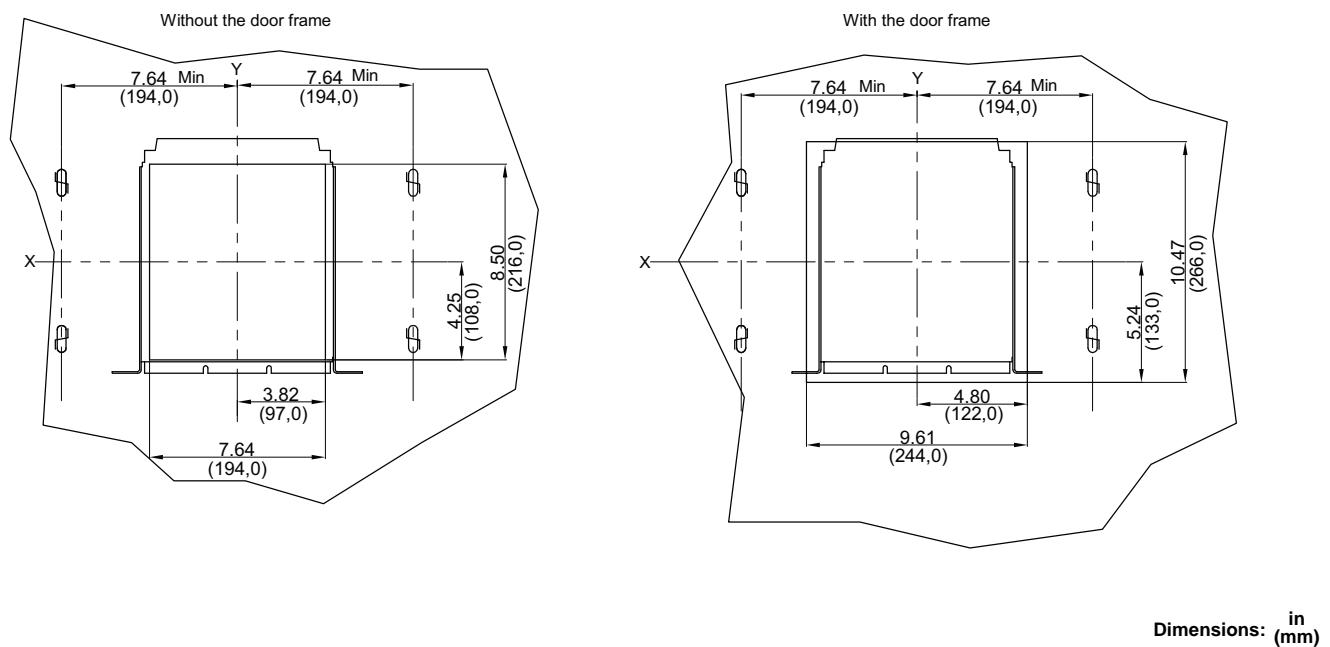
800-1200 A MasterPact NT IEC Four-Pole Fixed—Rear Cutout Dimensions
